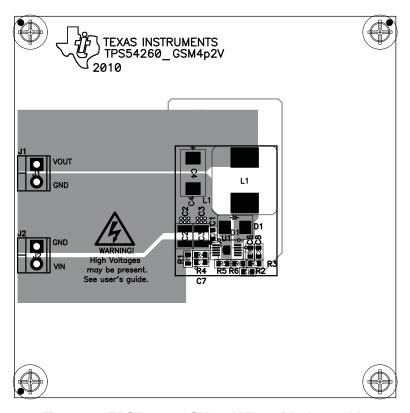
TPS54260_GSM4p2V Top-side Assembly
